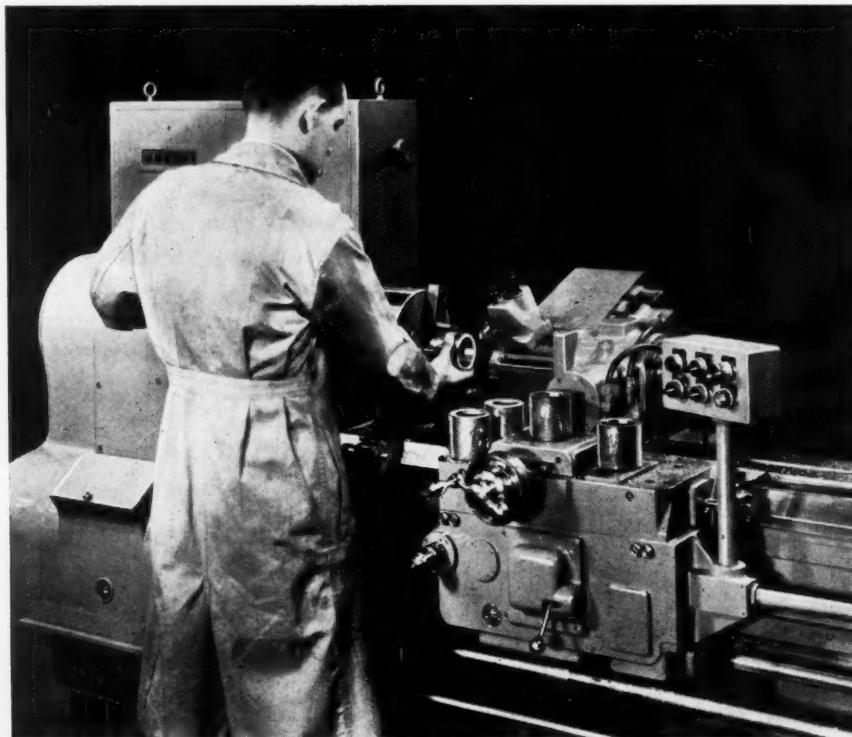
Operator is shown removing a rough- and finish-bored and faced bushing from a lathe having an automatic rough-finish cycle
